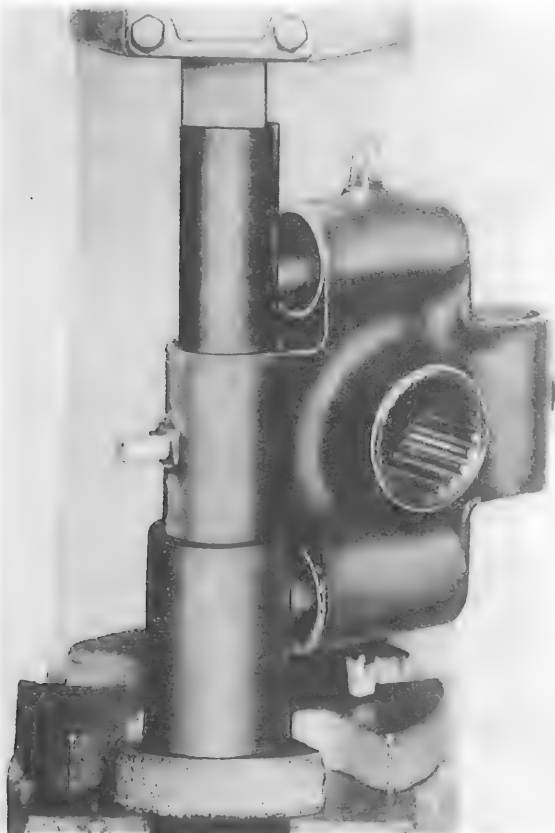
Pressing Out Seats, Bearings, Spacer, and Inner Race
